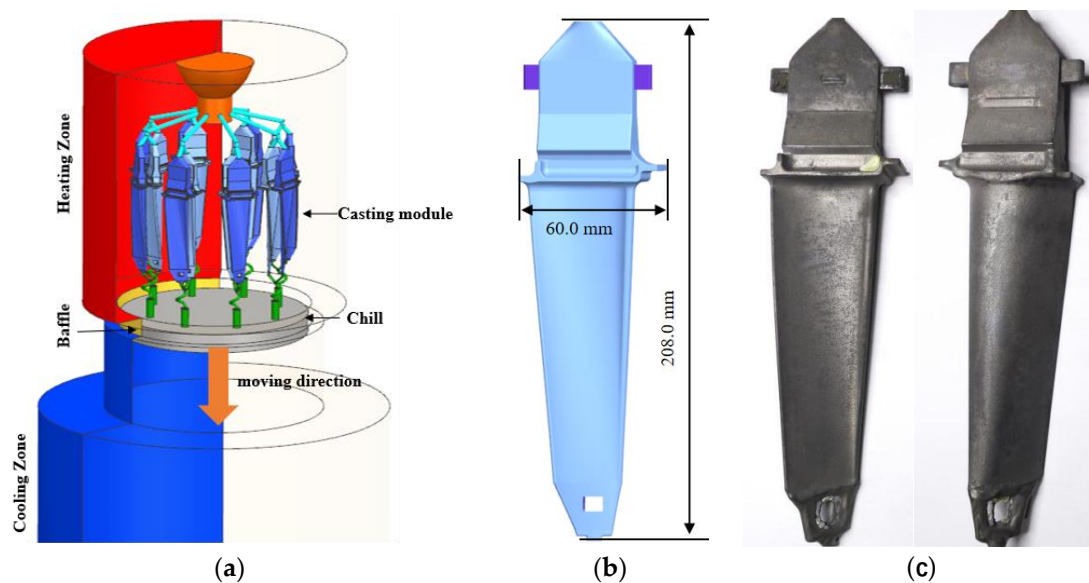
Schematic of the casting assembly in a Bridgman furnace and an example of superalloy single-crystal turbine blade: (a) Gating system assembly; (b) Geometry and dimensions of the blade; (c) Surface morphology of a as-cast single-crystal turbine blade.
